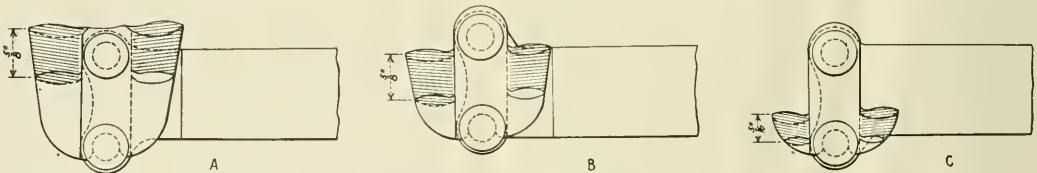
Morris No. 6 Tool-Holder and Double Cutter, the Equivalent of Six Forged Tools
